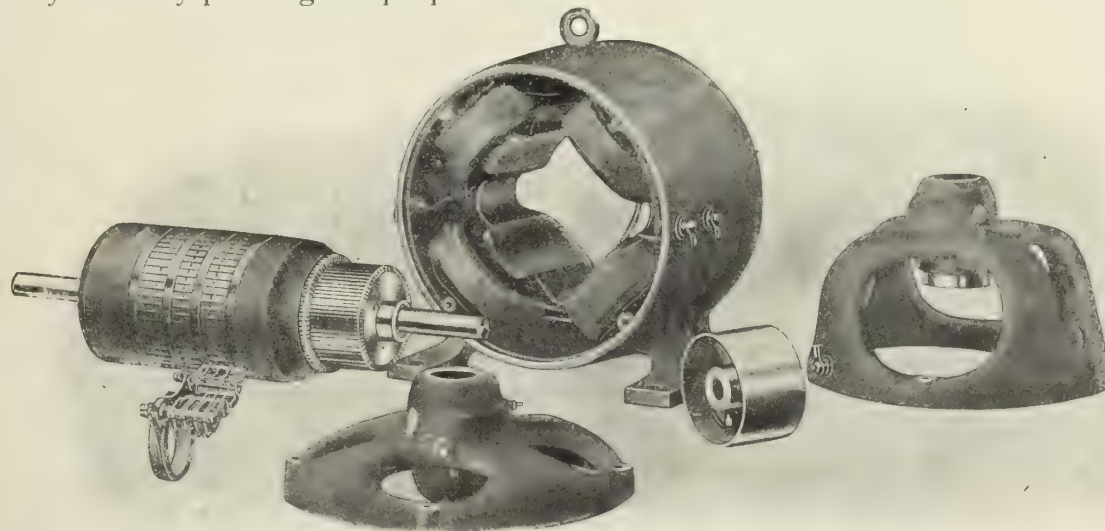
ELEKTRON MOTOR, CLASS H. SHOWING PARTS BEFORE ASSEMBLING
